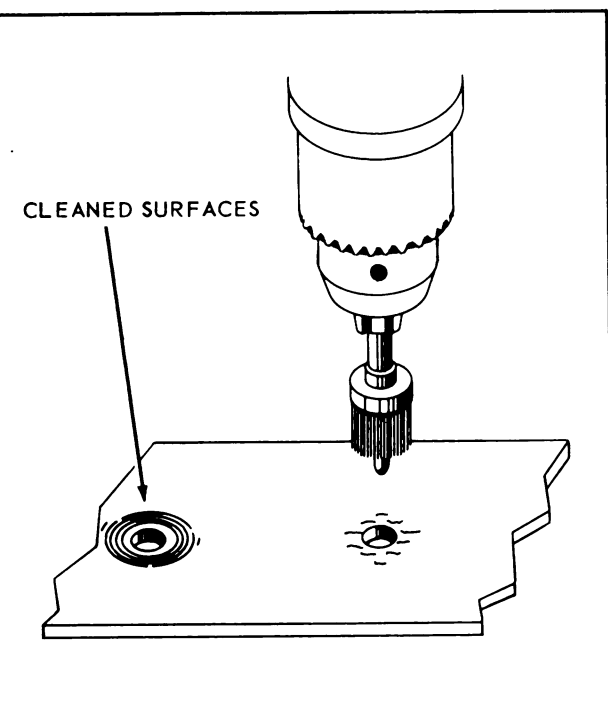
Steel Wire Brush with Pilot for Cleaning Aluminum Surfaces
